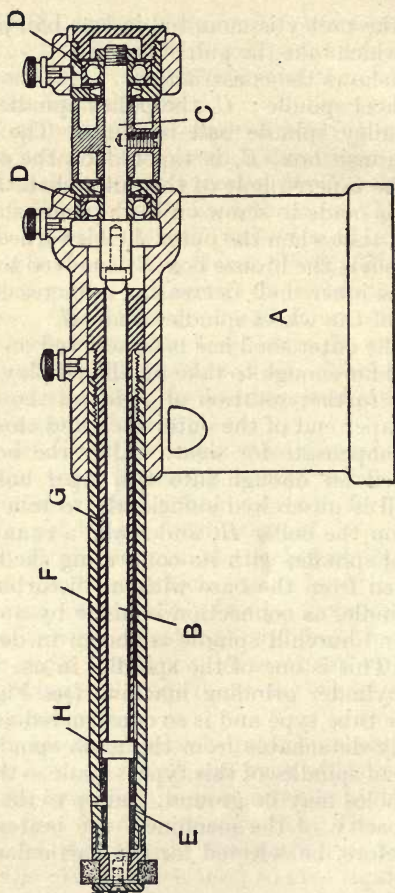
BROWN & SHARPE INTERNAL SPINDLE
